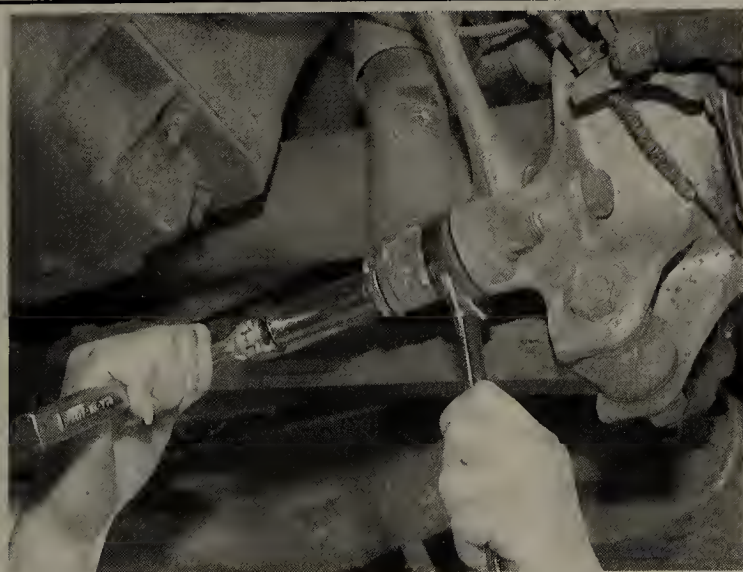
While holding the nut stationary with a wrench, loosen the lower shock mounting bolt
